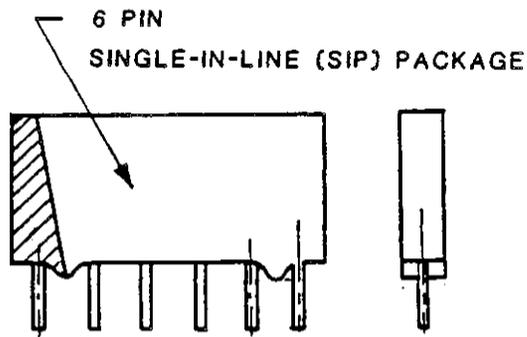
Outline drawing of a style RZ040 package configuration.
